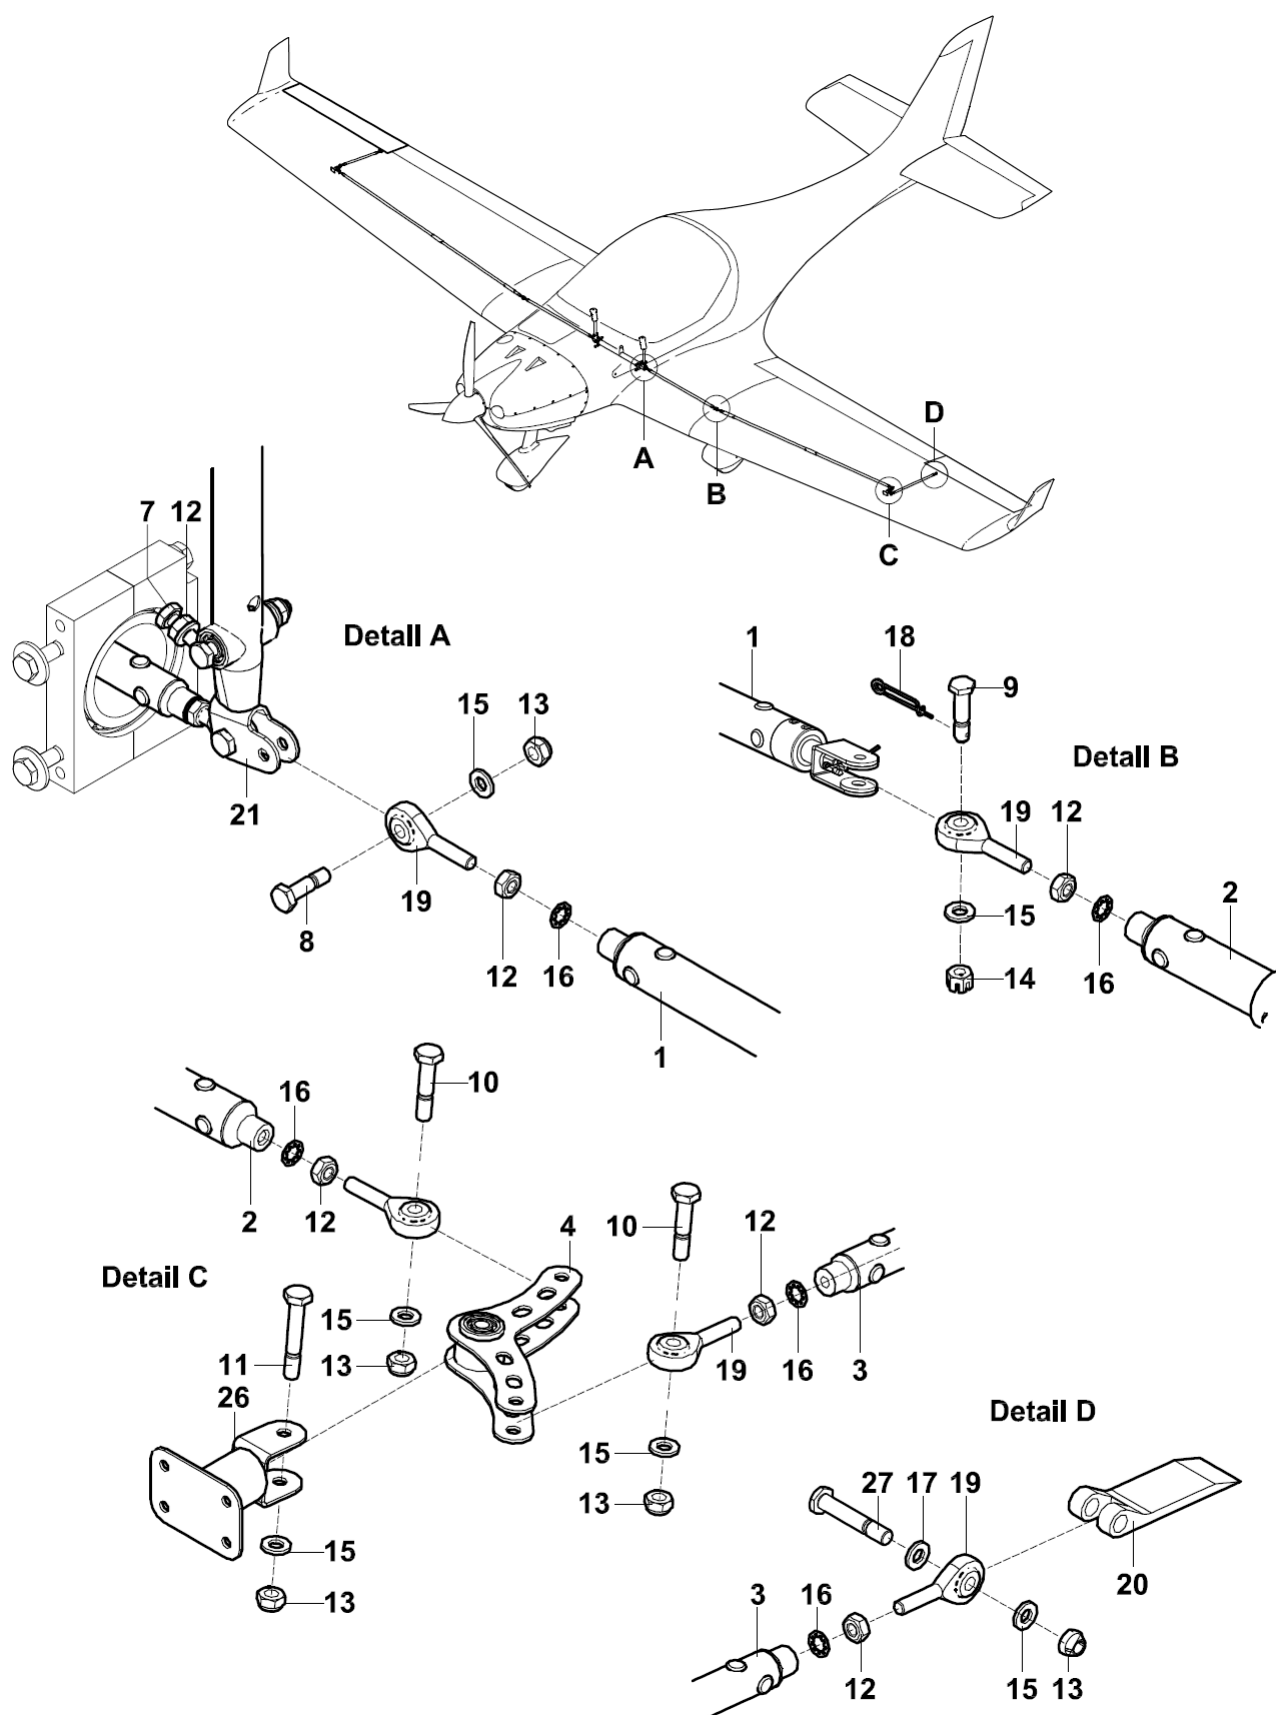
Aileron Control Removal / Installation (page 1 of 2)
